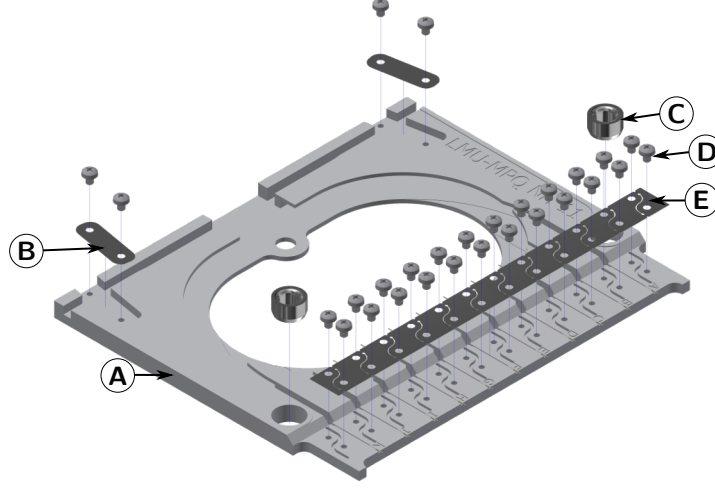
Holding plate for fibre machining and coating. (A) Holding plate, (B) Small clamping sheet for fibre ends, (C) Bushing, (D) Screw, (E) Clamping sheet for fibre tips
